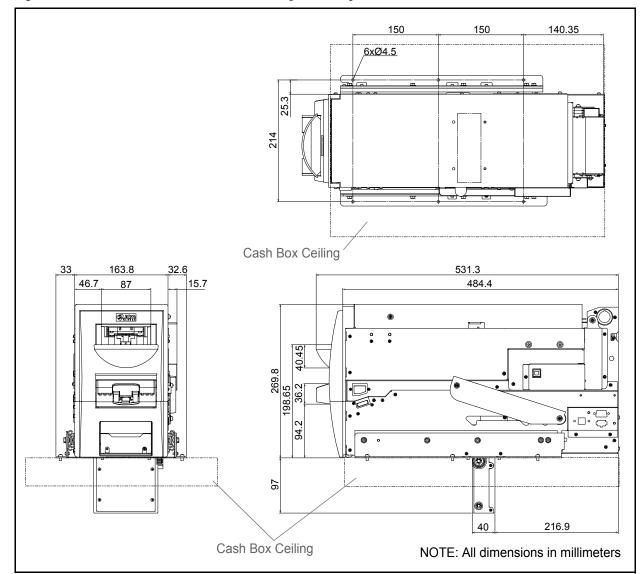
RDM-100 Unit with Optional Top Cover Entire Outside Dimensions
